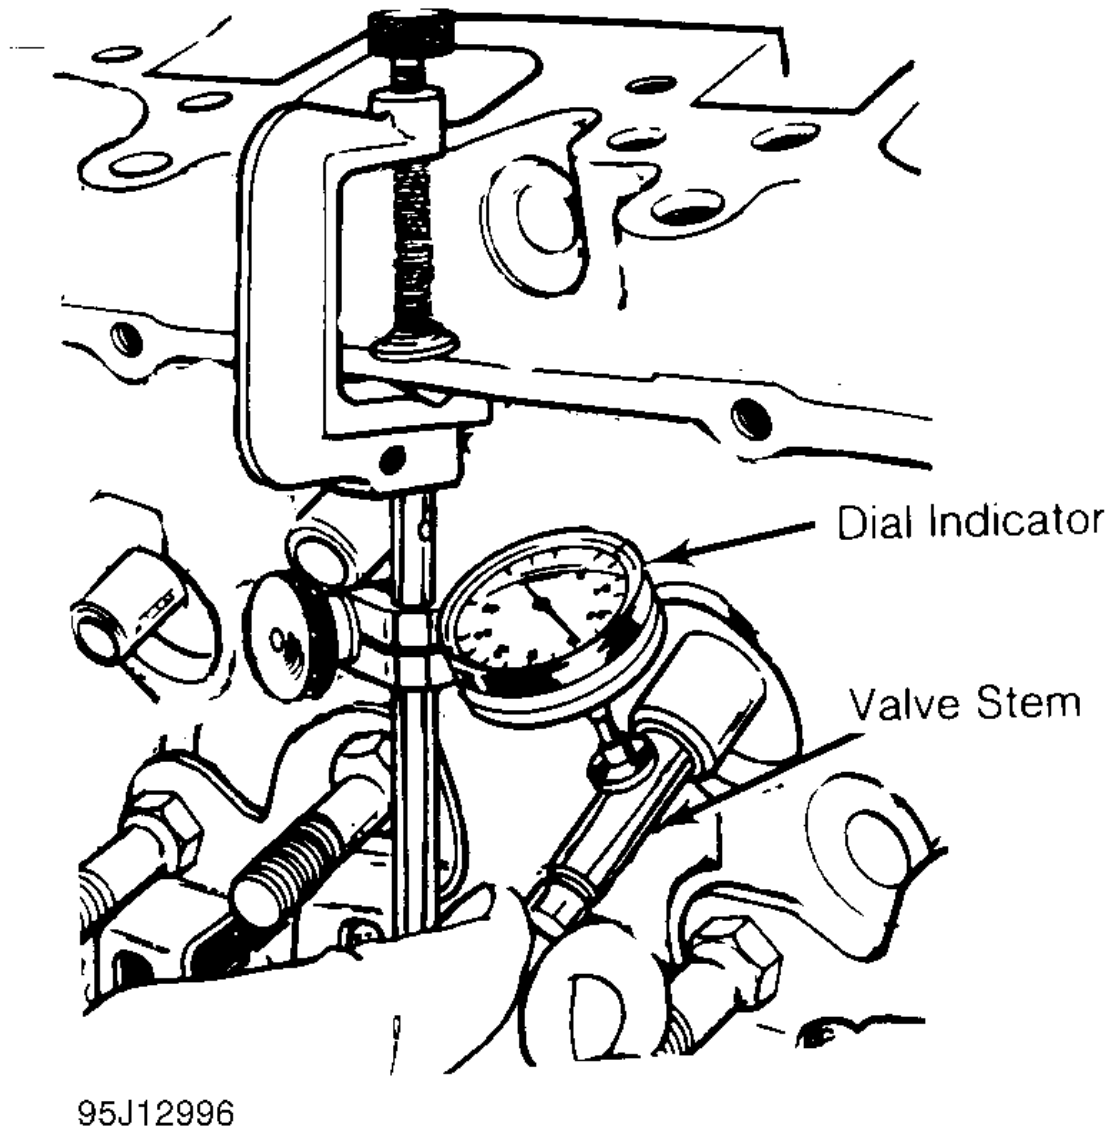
Measuring Valve Stem-to-Guide Clearance
